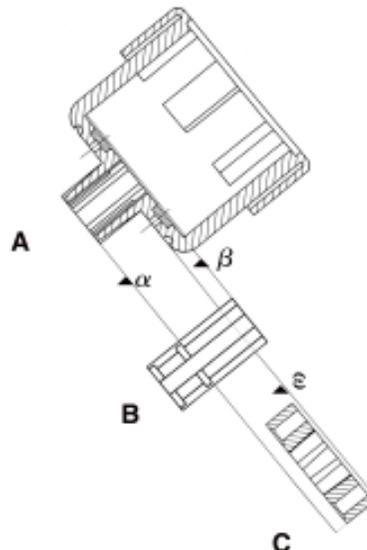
C - Correct alignment of drive assembly, sockets and collar
